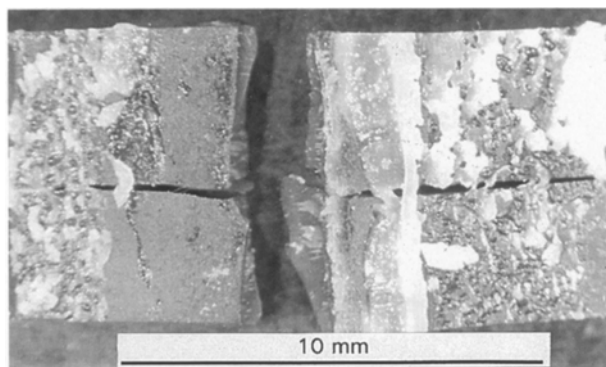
Typical compressive fracture of a bulk 914 resin Celanese test specimen of gauge length 4.3 mm, showing extensive axial cracking and regions of tab debonding.
